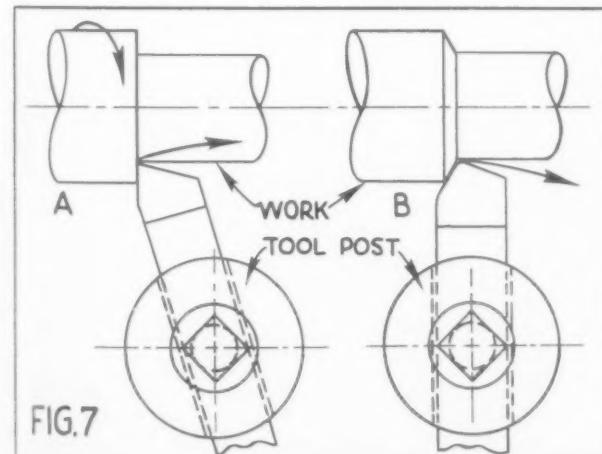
A tool whose cutting edge is ahead of the toolpost, as at A, might gouge in under heavy cutting pressure. If the gouge should go below the finished diameter, the workpiece may be spoiled as a result. The tool at B will swing clear from the work under undue cutting pressure, with increase in diameter which can later be corrected. If, however, a shoulder is required—as at A—then the bar should be turned with the tool positioned as a B and later swung over to cut the shoulder.
